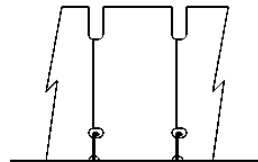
shows the principal block assembly method 3-2 adapted for bulb plate longitudinals, while figures 3.26 to 3.29 illustrate the seven options. The complementary option evaluation tables 3.22 to 3.28 are included as well.
